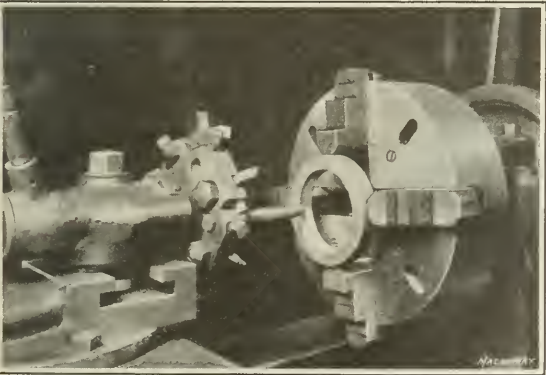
Magna Turret Toolpost in Operation on Lathe
